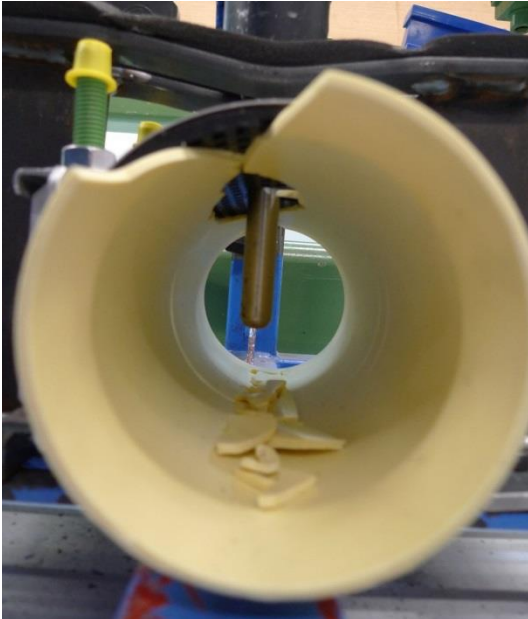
Brittle failure of a PVC-U segment surrounded by the repair clamp.
